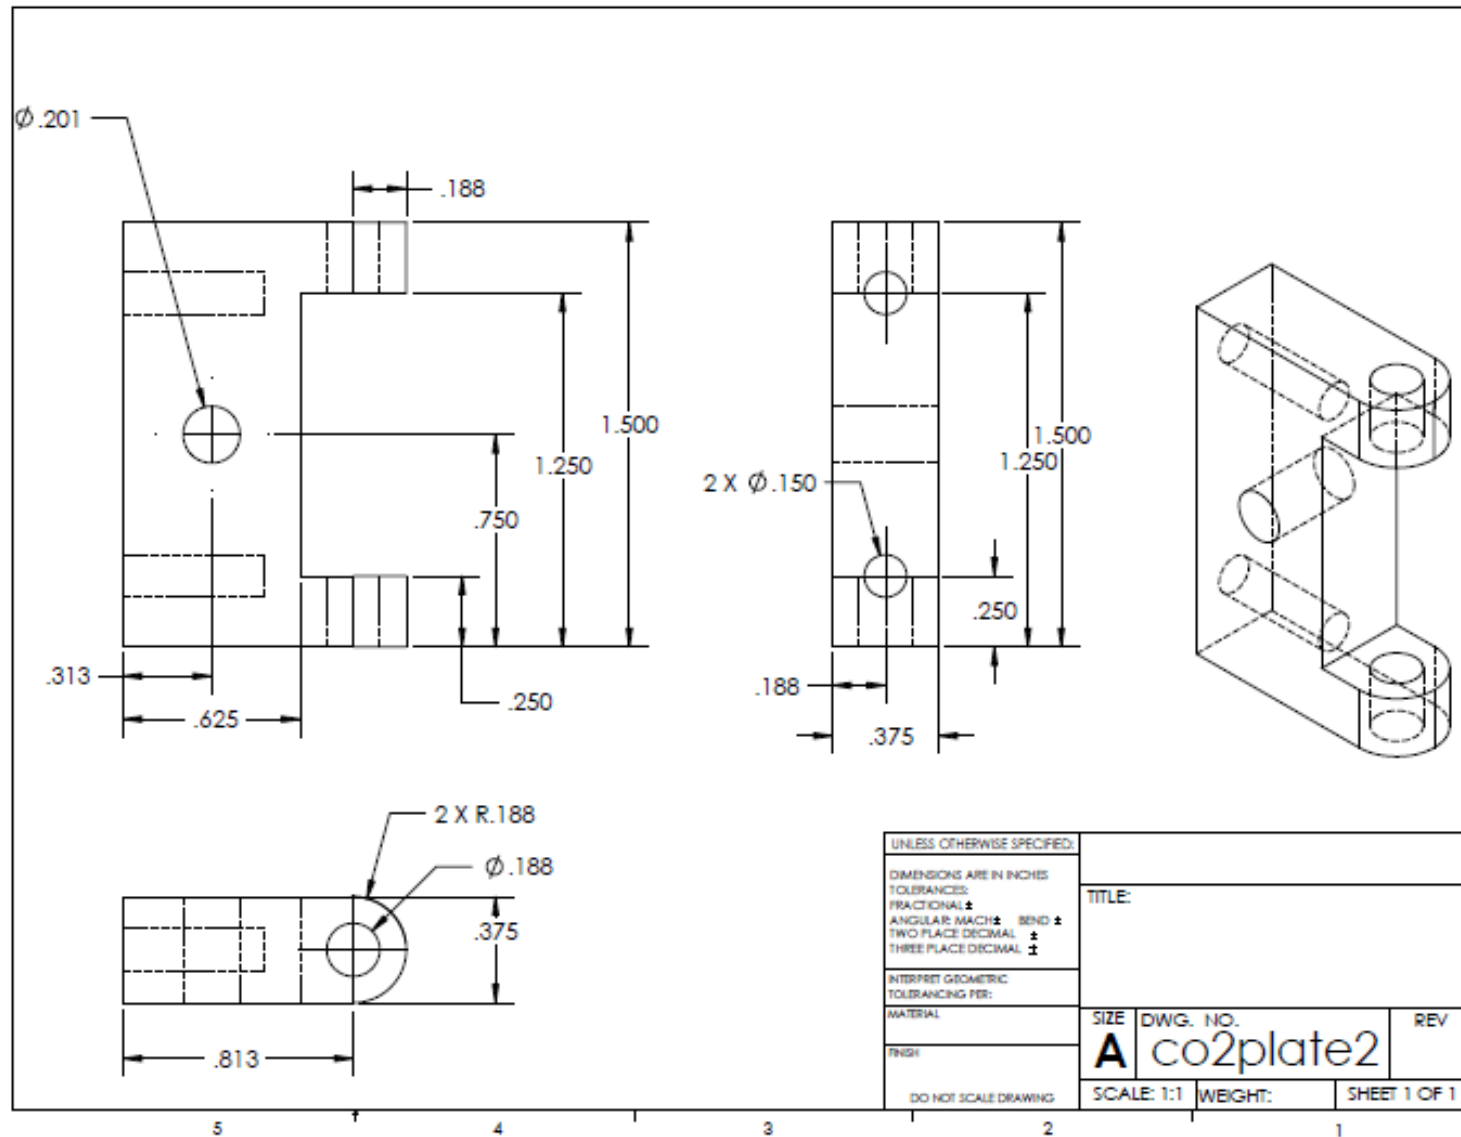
Engineering drawing of the supercritical CO₂ plate #2
